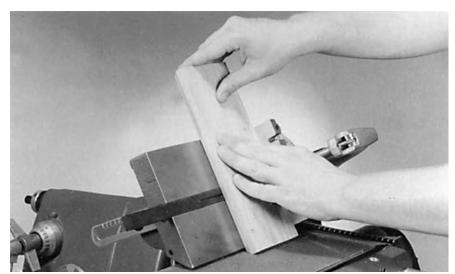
To sand a chamfer on the edge of a workpiece, secure the belt sander in the horizontal position. Install the worktable parallel to the belt and mount the miter gauge. Hold the workpiece flat against the worktable while moving it back and forth.
